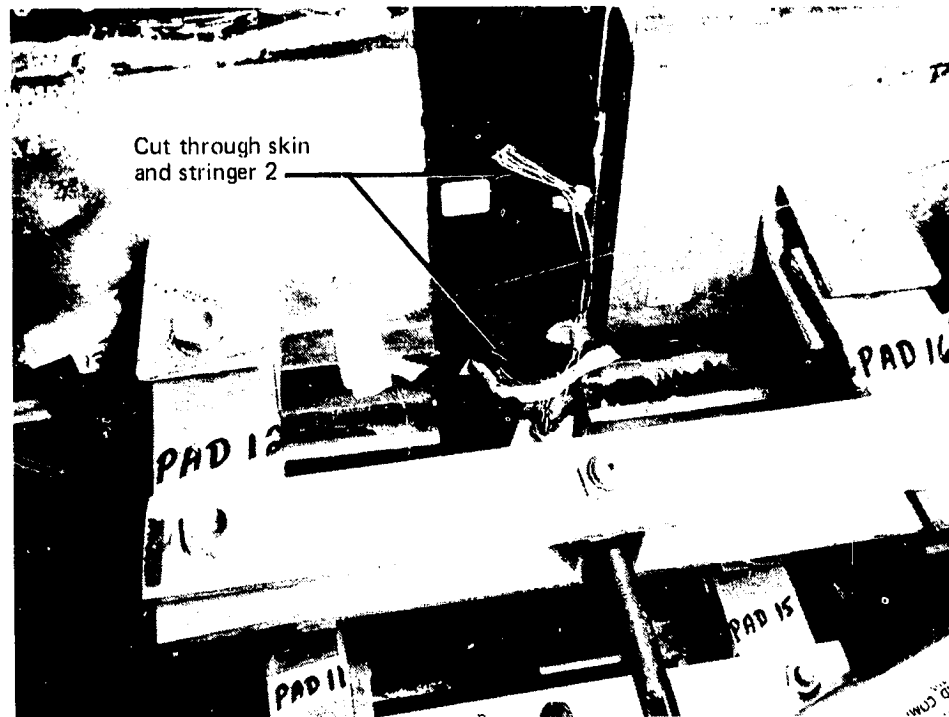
Stub Box Damage Tolerance Test—Cut Through Skin and Stringer
